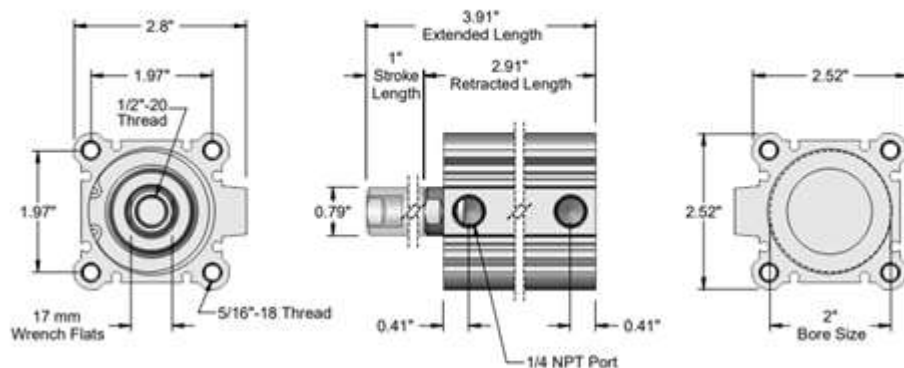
CAD Drawing of pneumatic actuator used in the HyperXite VII Pod
